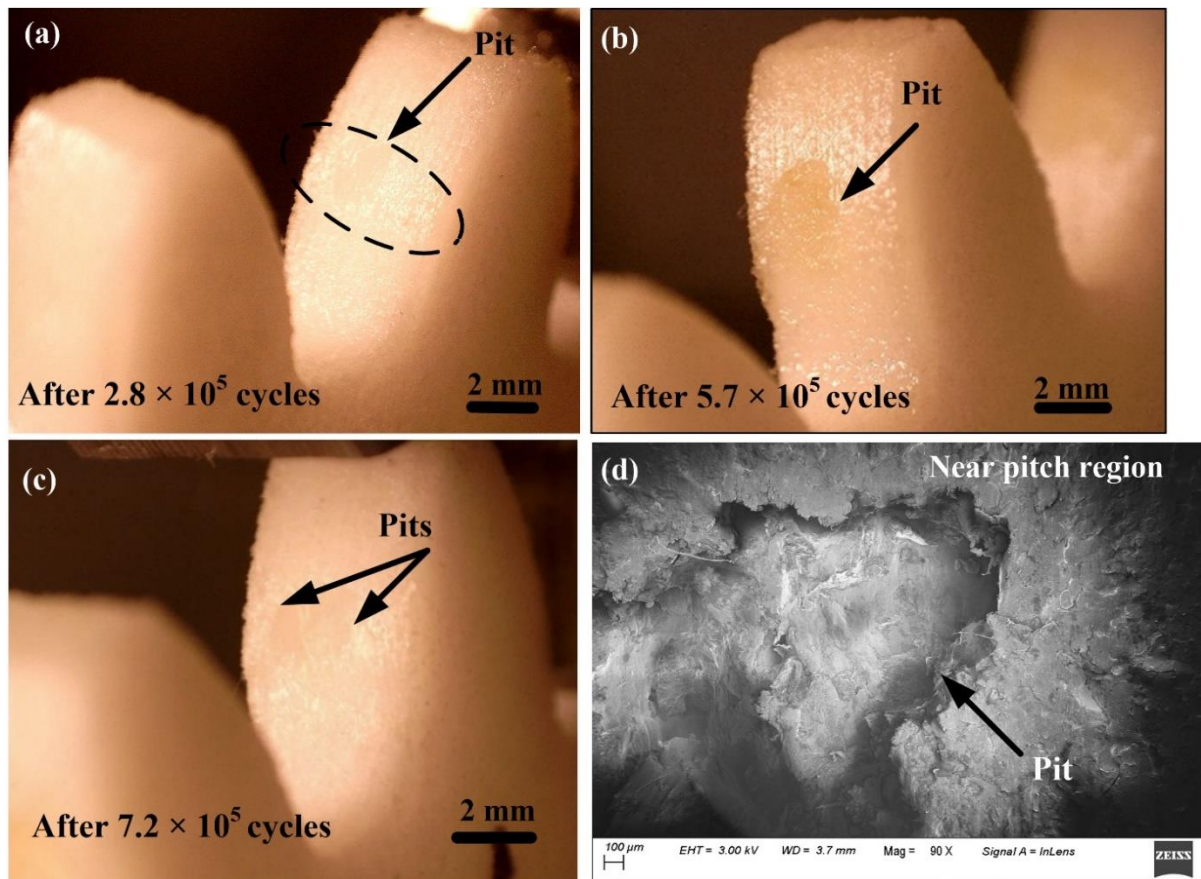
(a–d) Worn-out gear tooth surface at 3.5 Nm under lubricated conditions
